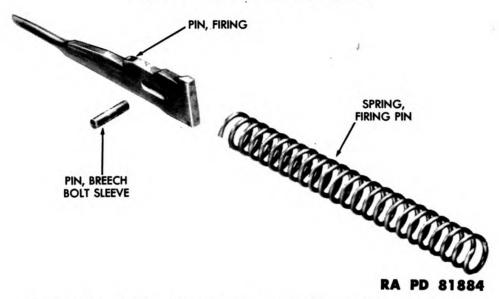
Firing Pin Group of Winchester Rifle, Cal. .22, Model 75 — Exploded View Showing Position When Assembled in Breech Bolt
